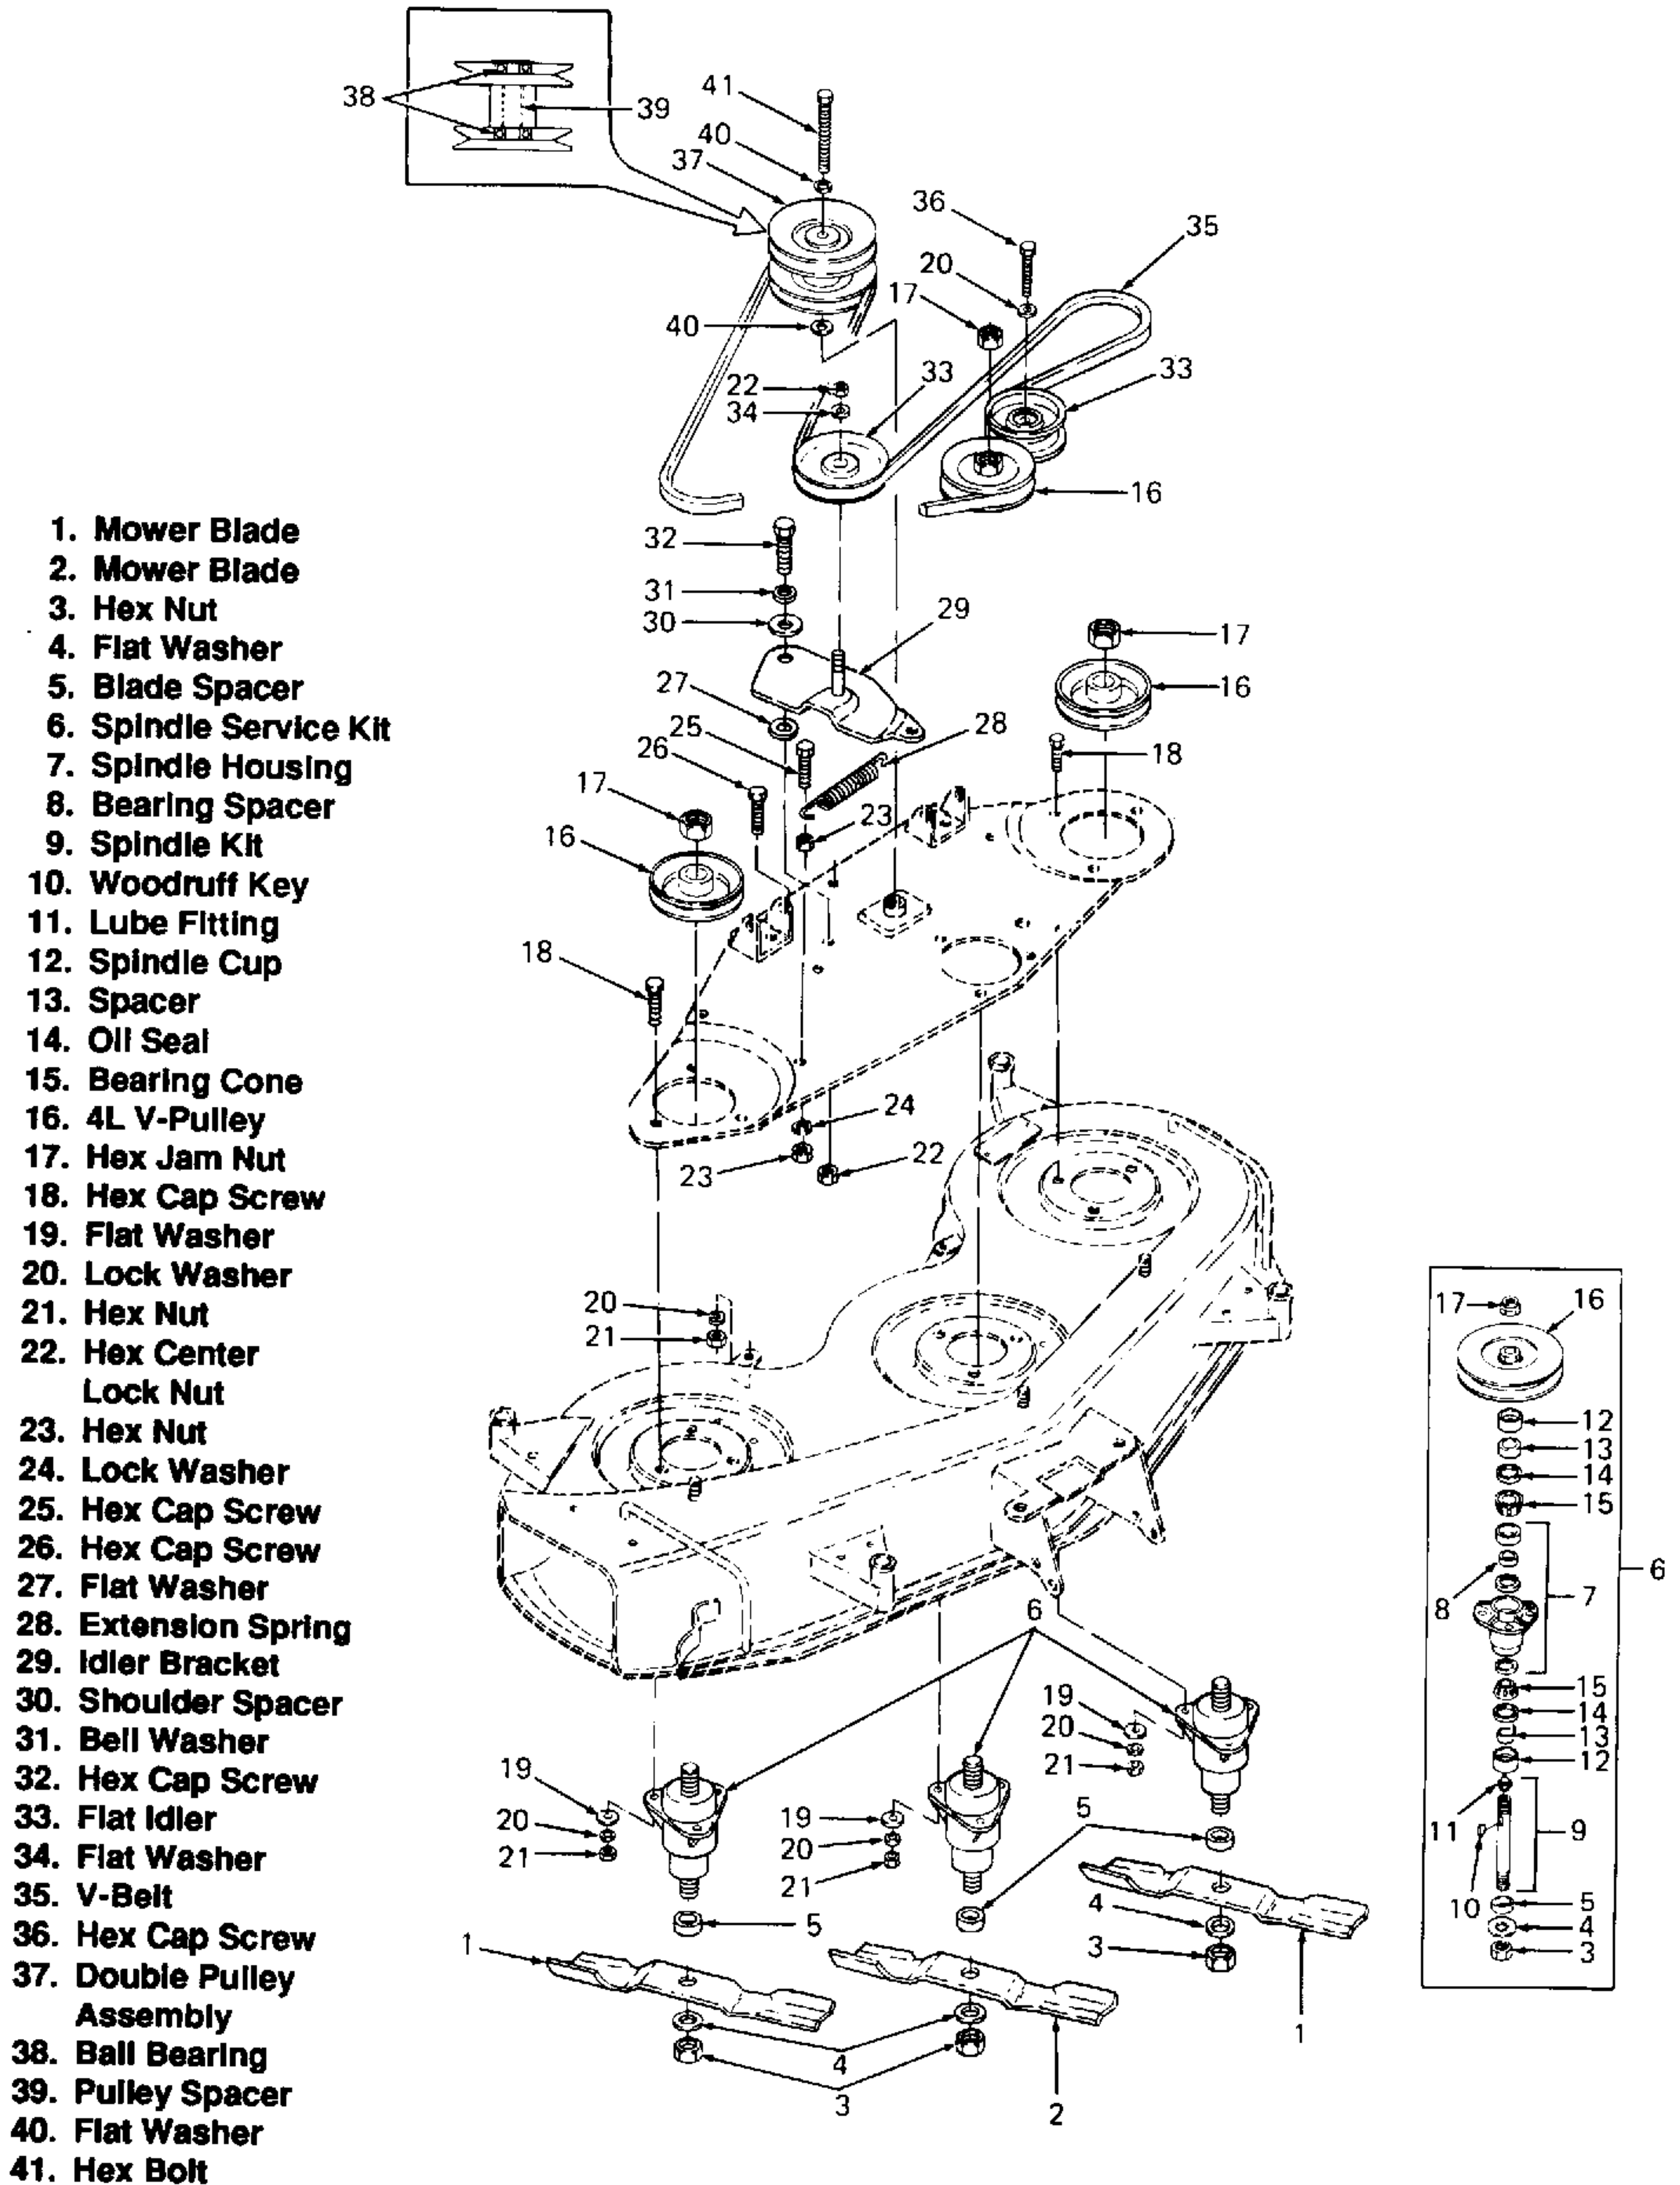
Spindles, Blades and Pulleys (Model 190-336).
